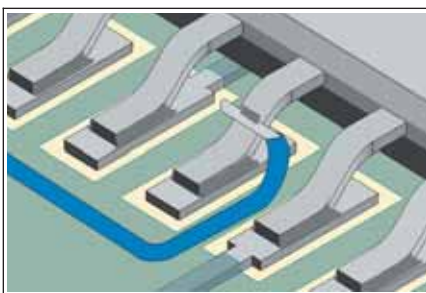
Not Recommended Wire soldered perpendicular to component lead.
